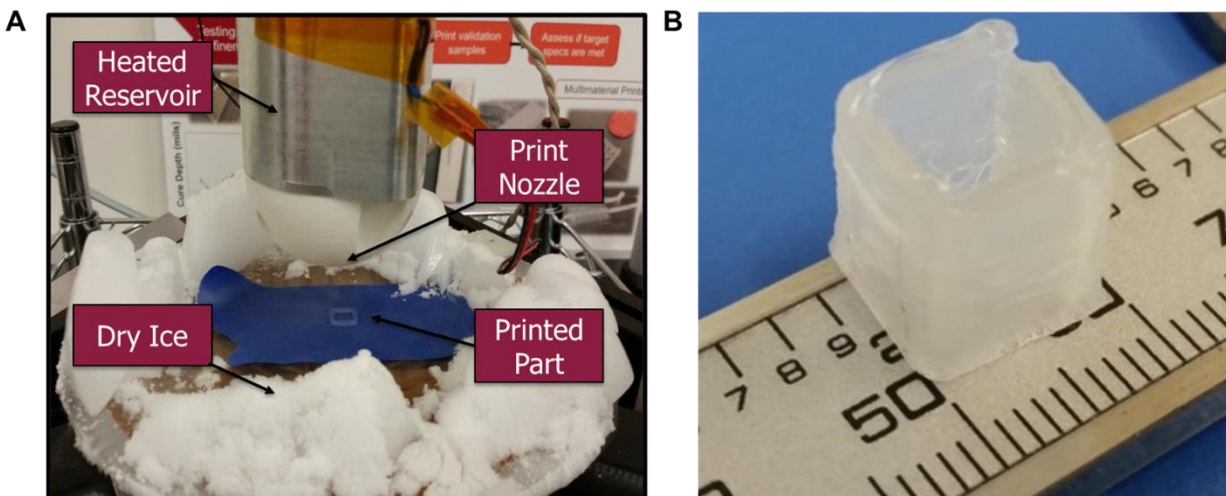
(A) A custom built, extrusion 3D printer printing onto a build stage cooled by dry ice and (B) a 10 mm³ hollow cube of PEU 2000 3D printed at a low extrusion temperature (80 °C).
